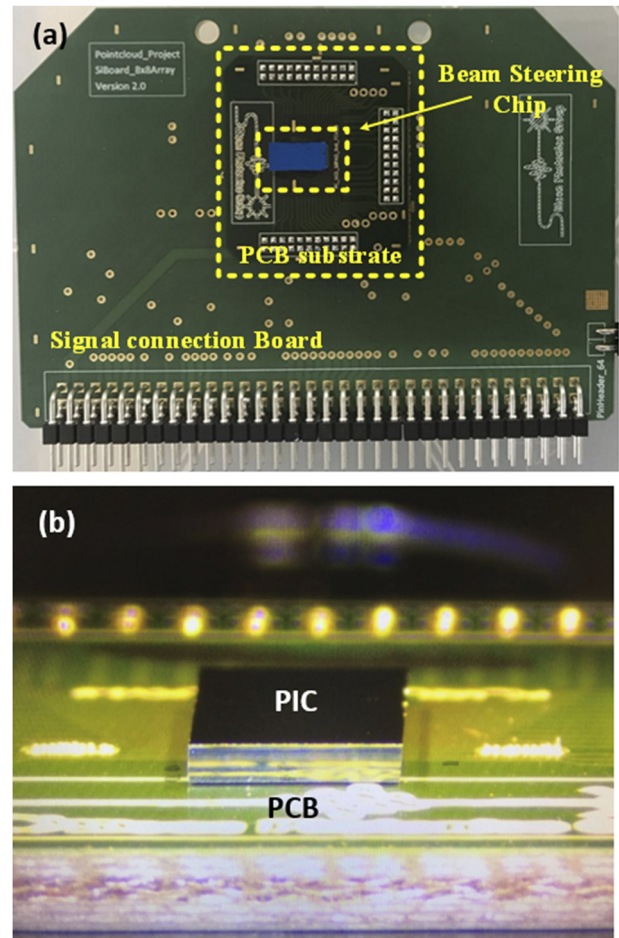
Photograph of the silicon photonic beam steering chip mounted on the printed circuit board: (a) top view and (b) side view.
